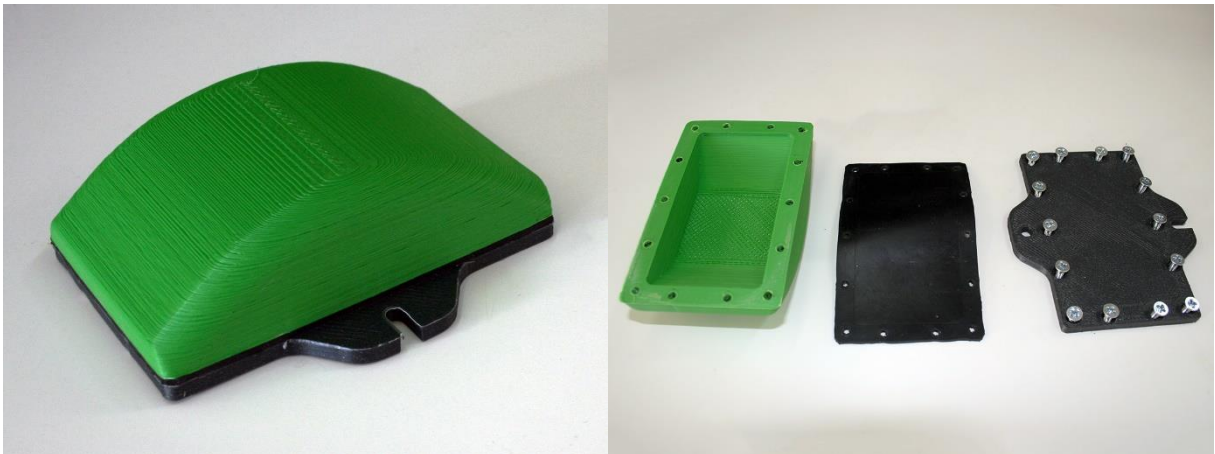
The first design of the turtle tag. On the left is an assembled tag and on the right three parts of the tag – a shell, a lid and a rubber sheet.
